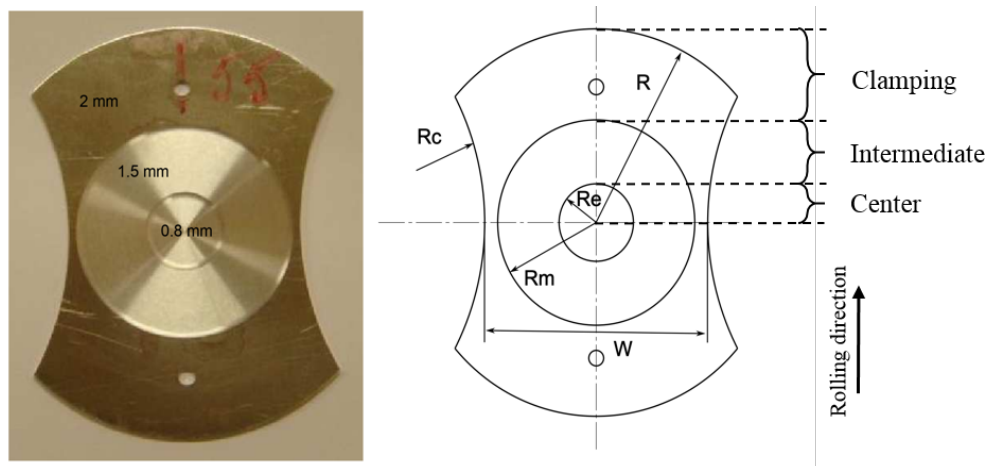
Dimensions of Marciniak test specimen with three thicknesses (0.8mm, 1.5mm and 2mm)
